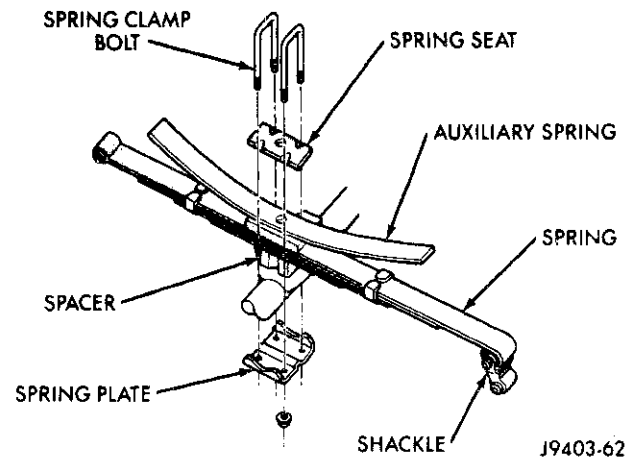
Rear Spring—Cab-Chassis 11000 GVW
